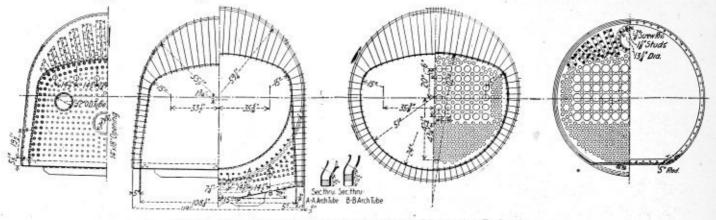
Sections and End Elevations of Mallet Locomotive Boiler
